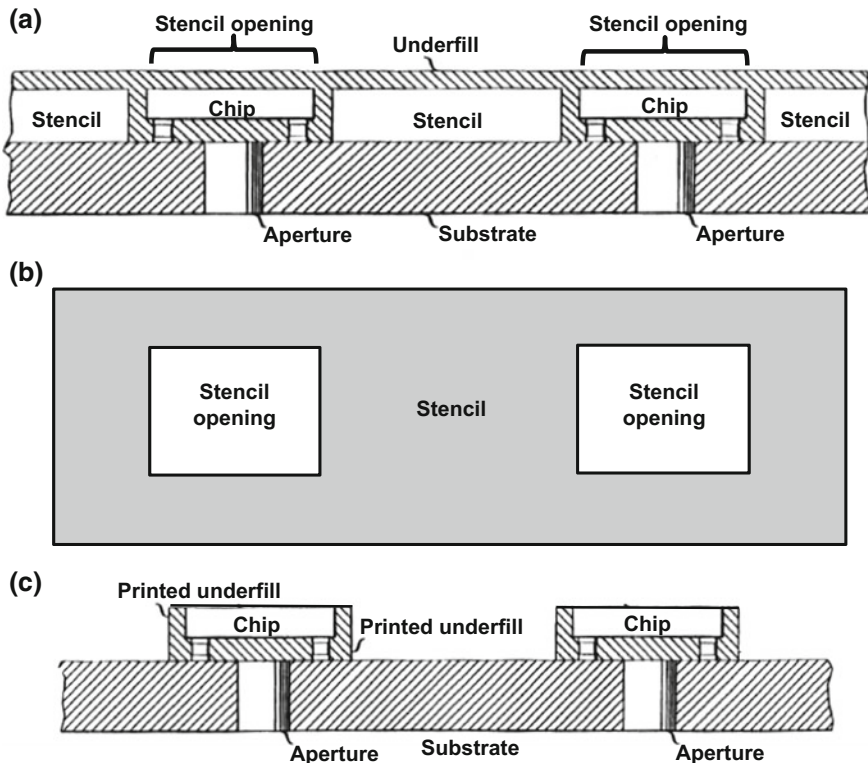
a Lucent Technologies' stencil printing of underfill. b Stencil openings. c Printed underfill
